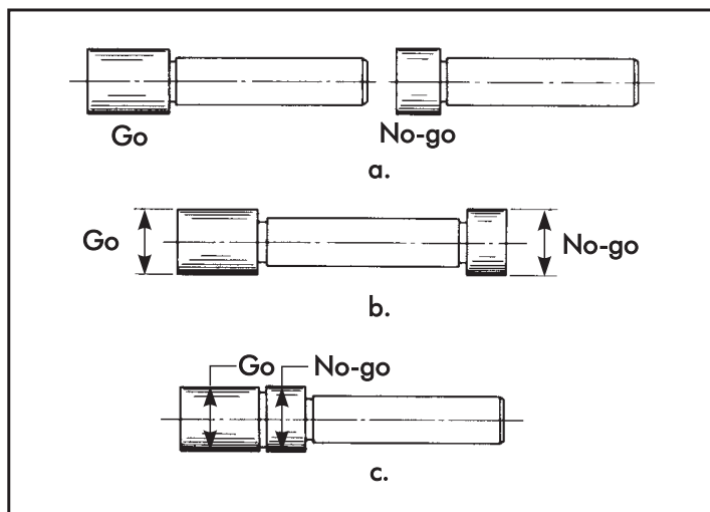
AGD cylindrical plug gages used to inspect the diameter of holes [29].
